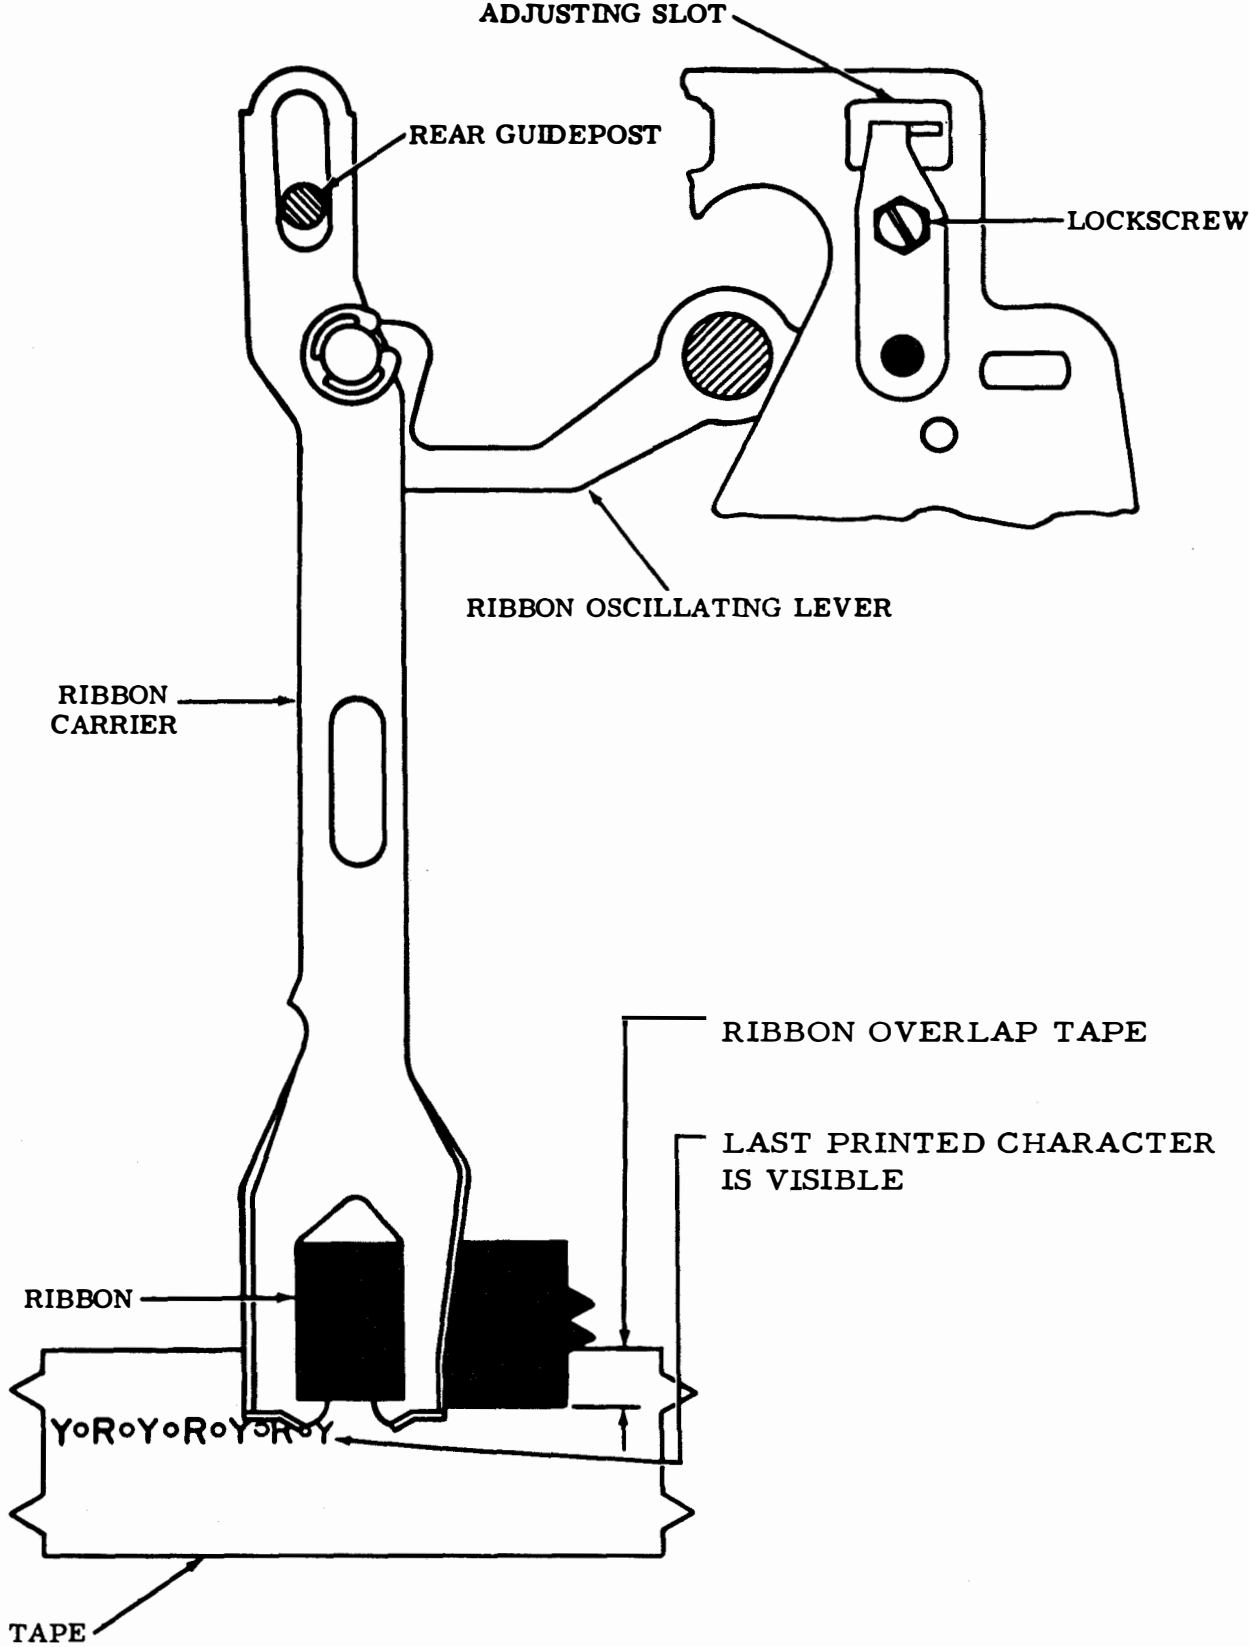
Ribbon Carrier for Fully Perforated Tape - Top View
